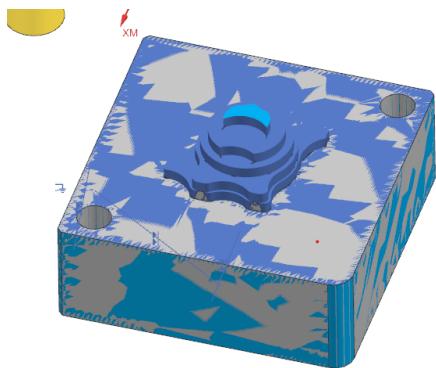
$\frac{3}{4}$ " Cavity Mill Roughing
